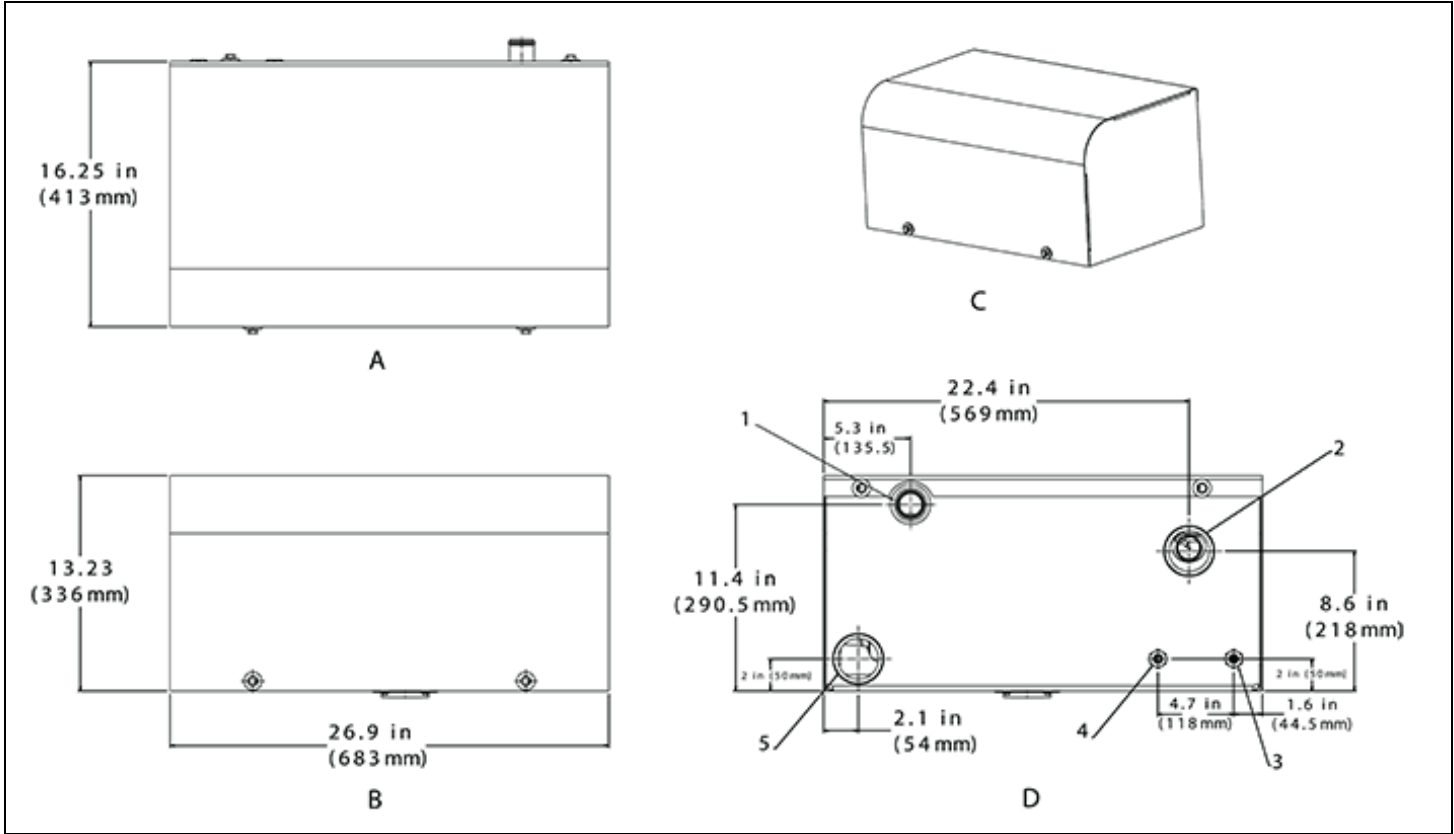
Thermo E+ 320 enclosure Box Dimensions
